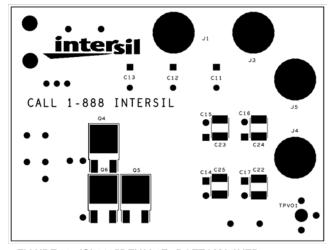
ISL8105BEVAL2Z - BOTTOM LAYER (SOLDER SIDE)
